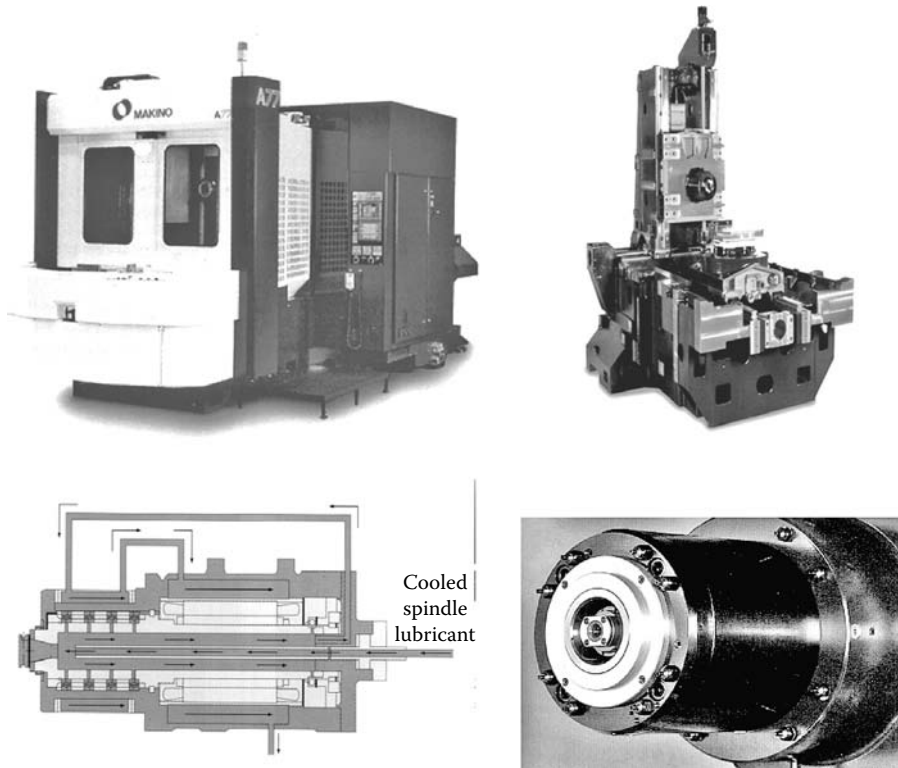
Multiaxis machining center for grinding land-based gas turbine buckets with plated CBN wheels to replace milling and HSK automatic wheel changing.
